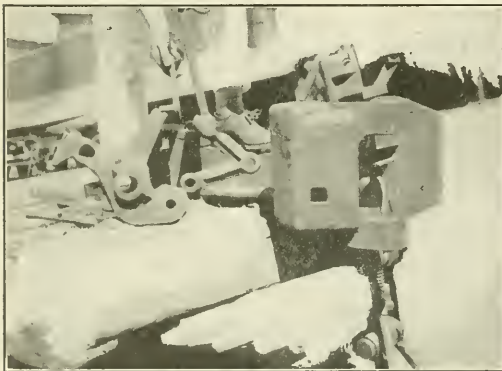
Coupler Head With Knuckle and Locking Details Adrift. Screw Coupling is Pin Hanging From Centre
